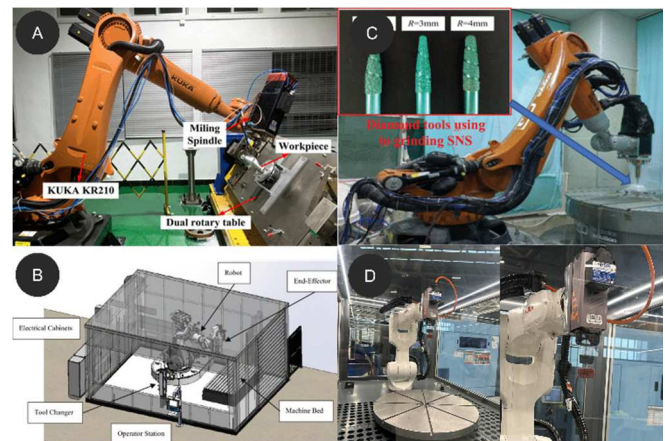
Robotic Milling A [9] and Drilling B [10], Grinding C [21] and Flexible robotic machining setup with Polishing tool D.
